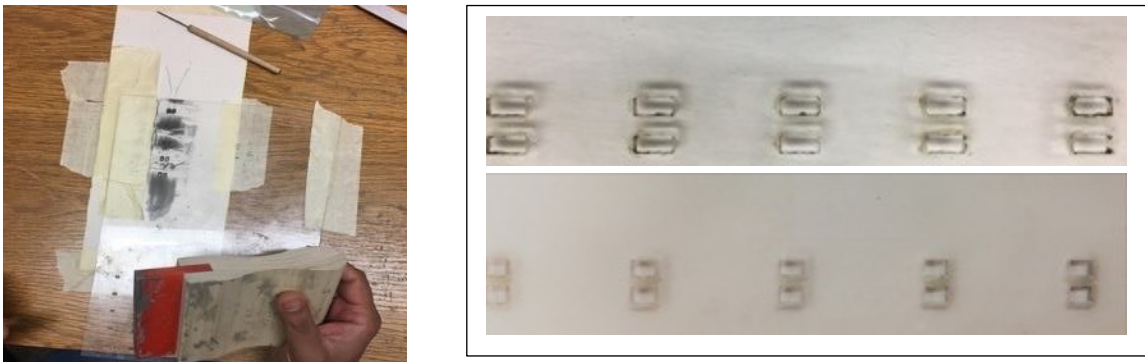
Solder deposition: solder paste screening through the holes onto the fabric via a printmaking squeegee (left) and 3mm solder mask (bottom) & 5mm solder mask “screened” through the holes onto the fabric via a printmaking squeegee. Solder paste was mixed with an equal amount of gel flux, to lower the viscosity of the solder for easier application and better adherence to the rough surface texture of the stitched textile.
